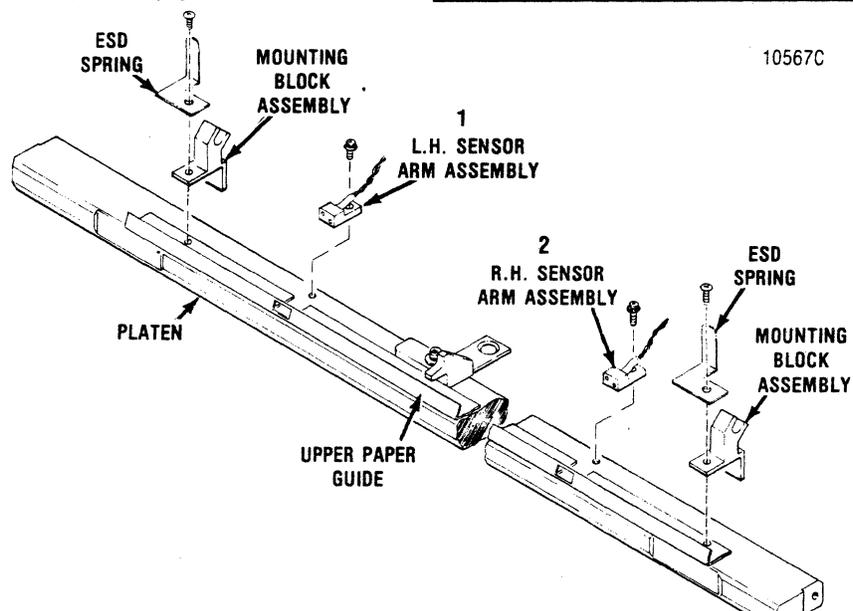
Removal/Replacement, Sensor Arm and Mounting Block Assemblies
